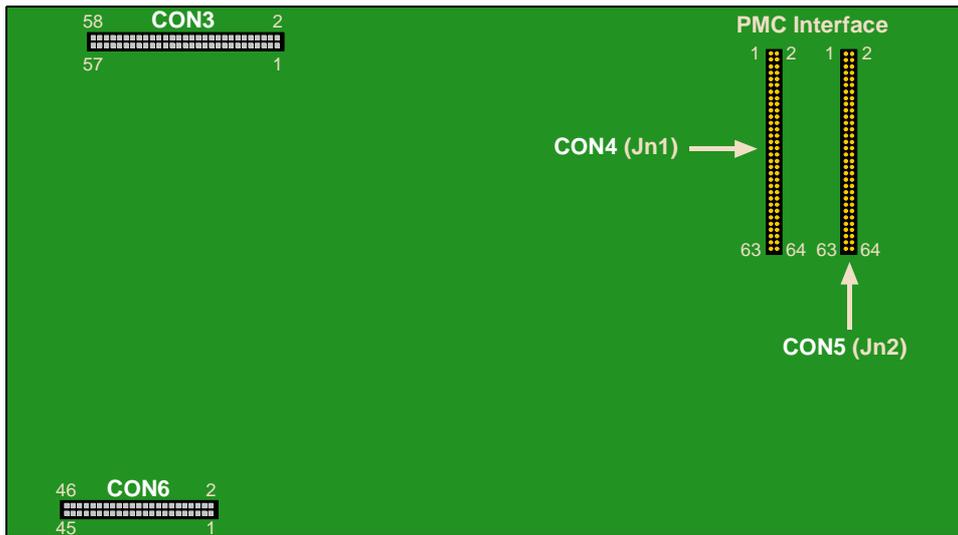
PMC Module Layout, Version without CPCI Connectors (Rear View)
